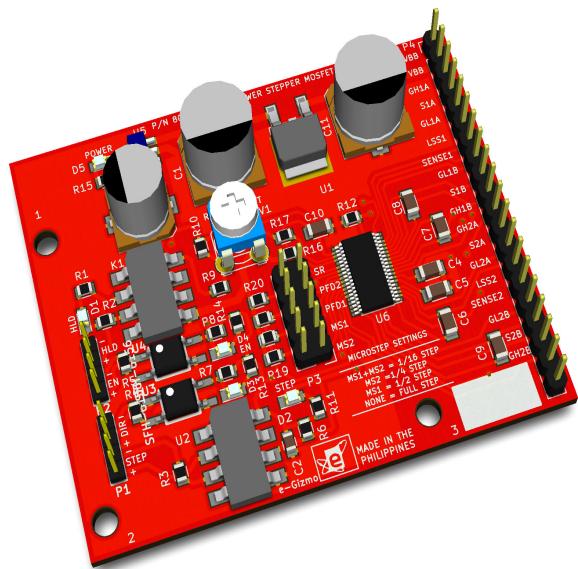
Major parts presentation of Power Stepper MOSFET Driver Board
